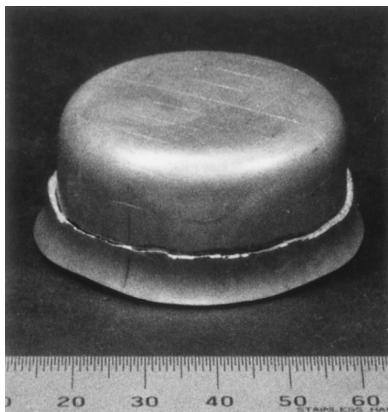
Fracture at sidewall in deep drawing test for the 2024 sheet and  $d_0 = 70$  mm.
